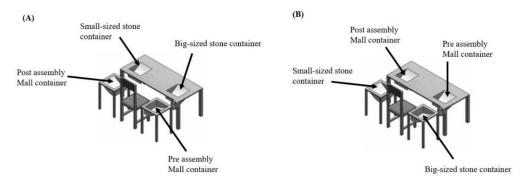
Work facilities layout (A) the first layout and (B) the second layout.
